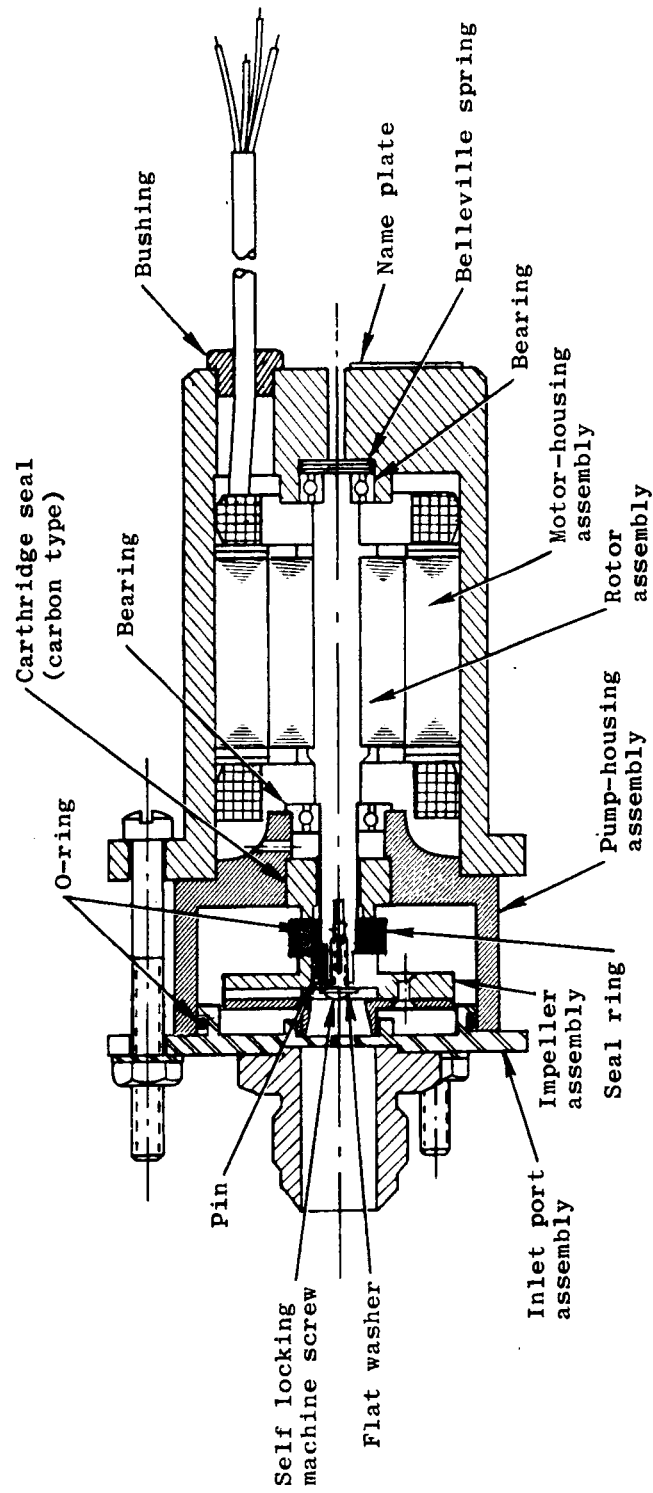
Sectional view of coolant-pump assembly for BP-13 spacecraft.
